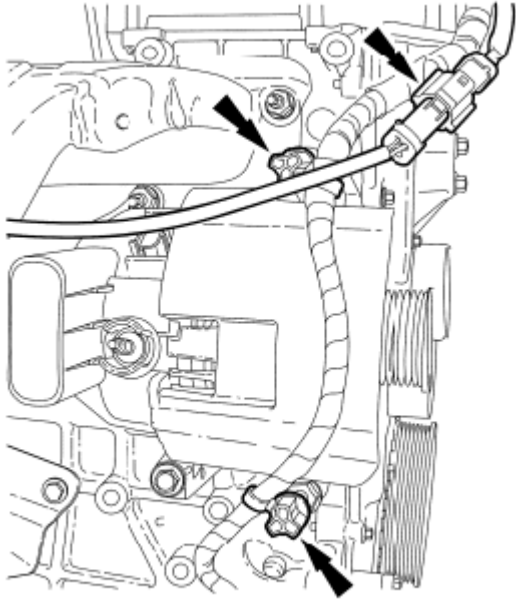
Locating Crankshaft Position Sensor Electrical Connector & Wiring Harness Pin-Type Retainer
